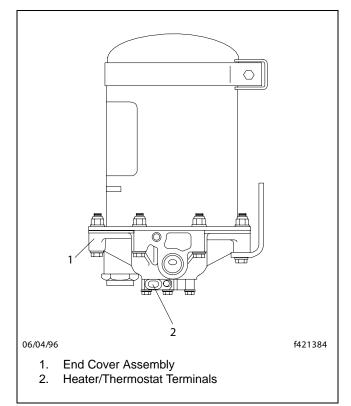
Bendix AD-9 Air Dryer Heater and Thermostat Check Location
